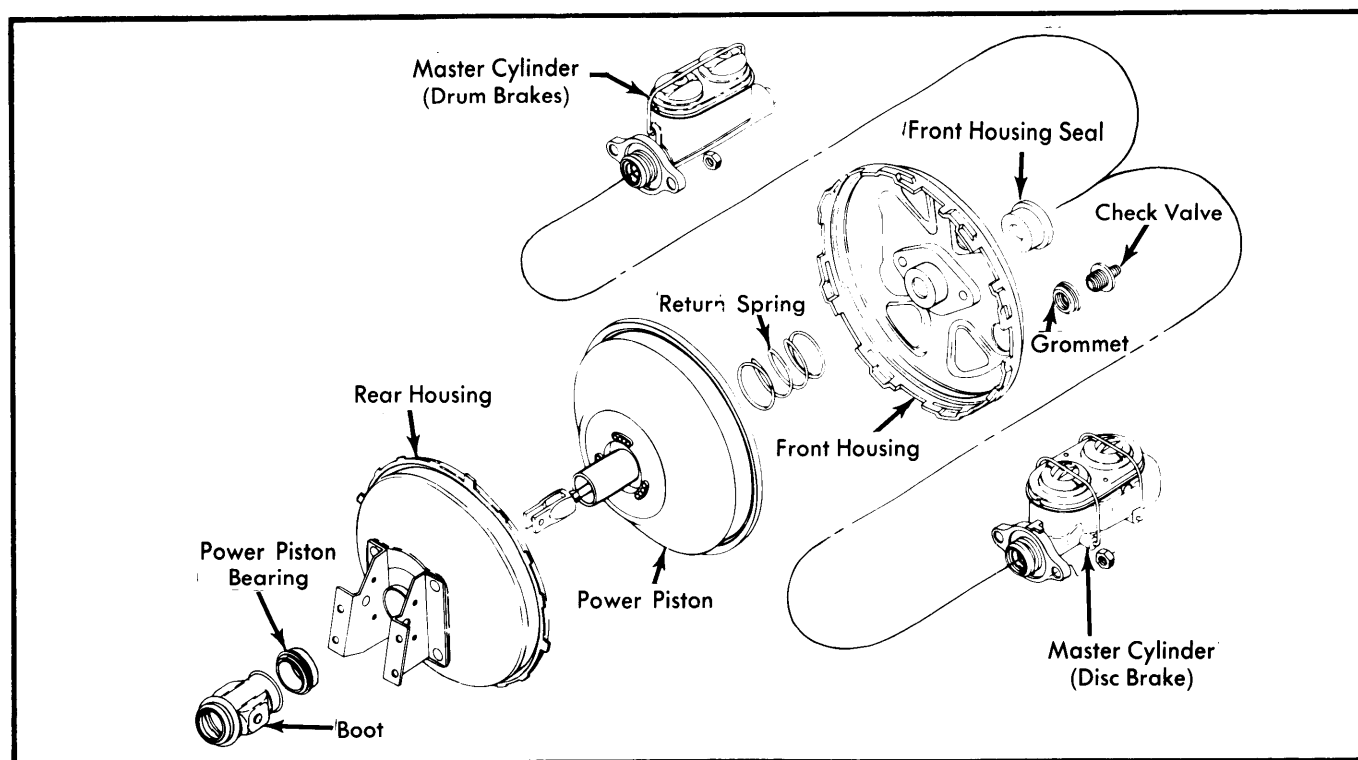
Exploded View of a Typical Delco-Moraine Single Diaphragm Power Brake Unit
